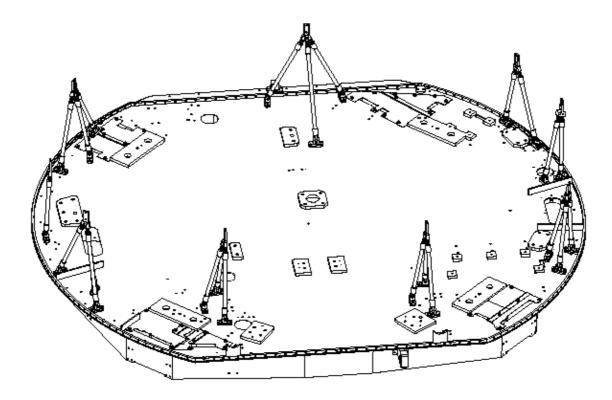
OBA Overview of the Optical Bench Plate sub-assembly, front side
